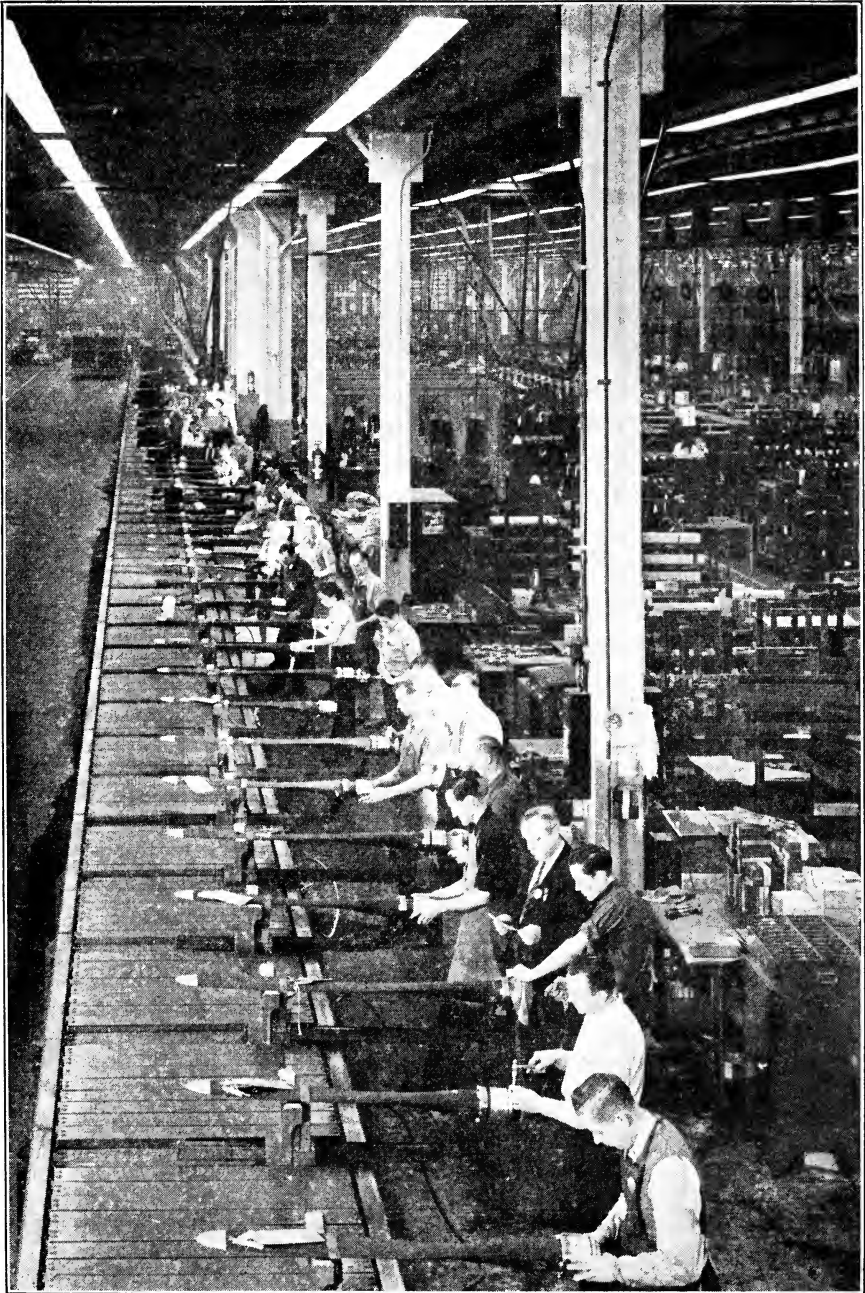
Assembly line for propeller blades of different lengths. (*From Machinery.*)
